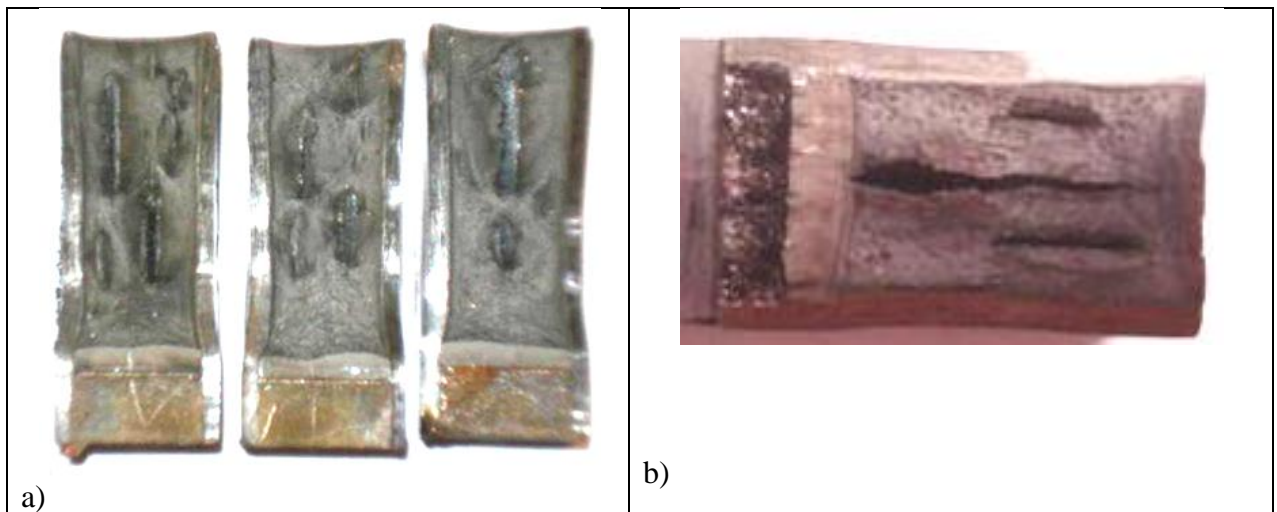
a) Typical fracture surface of SE(T) specimens with multiple delaminations, b) fracture surface of the SE(T) specimen with main and secondary delaminations.
